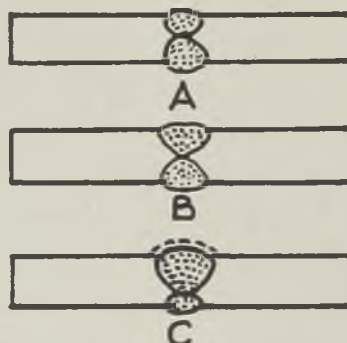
(Right above)—Various types of butt joints, while employing different joint preparation, all depend upon welded joints no thicker than plate itself. Excess weld metal as at C is wasted and usually weakens the joint instead of strengthening it
